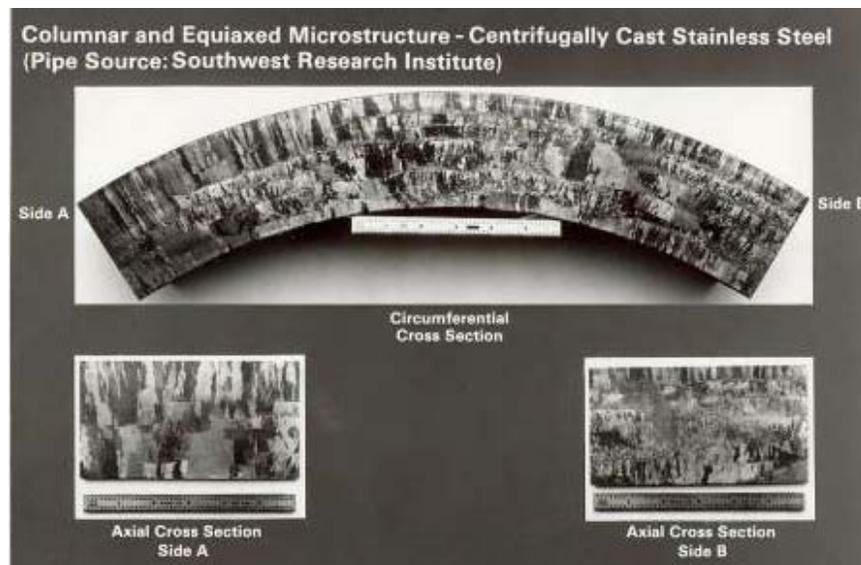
Circumferential and Axial Cross Sections of a Centrifugally Cast Stainless Steel Pipe Section Provided by Southwest Research Institute
